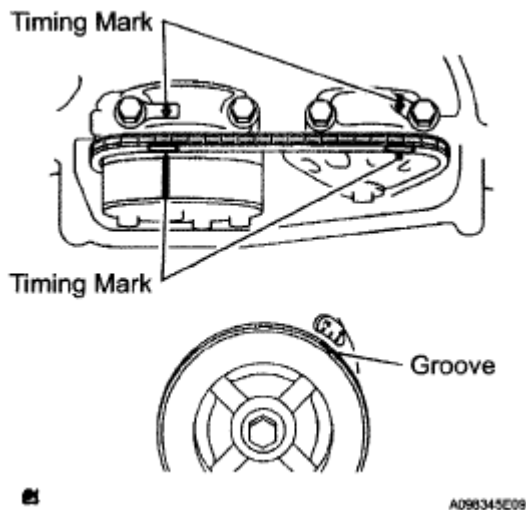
Identifying Timing Mark Of Camshaft Timing Gears
